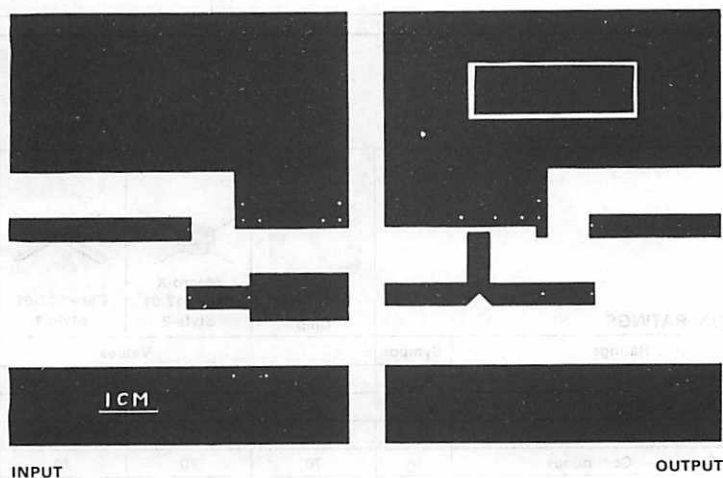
PRINTED CIRCUIT BOARD LAYOUT
